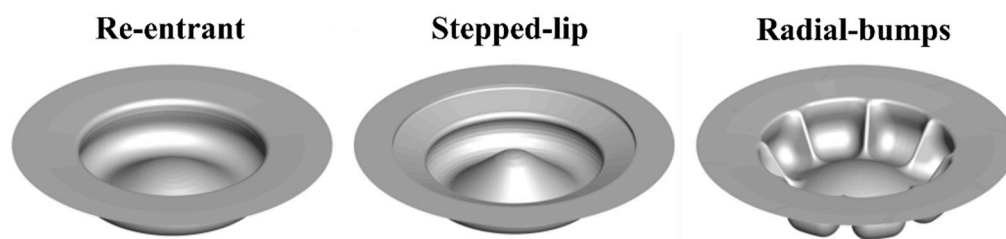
Isometric view of the piston bowl geometries: (left) re-entrant; (middle) stepped-lip; (right) radial-bumps.
